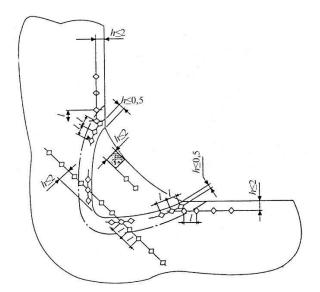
Arrangement of hardness measurement points in the heat affected zone and in the weld for tee joints completed in one run as a fillet weld without bevelling (restriction for l according to Fig. 6.4.6-2)
